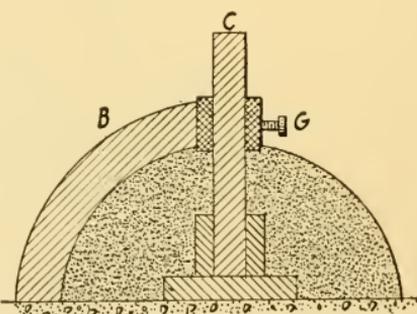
Spindle and sweep placed for cutting down the sand to make the inside of the casting.
